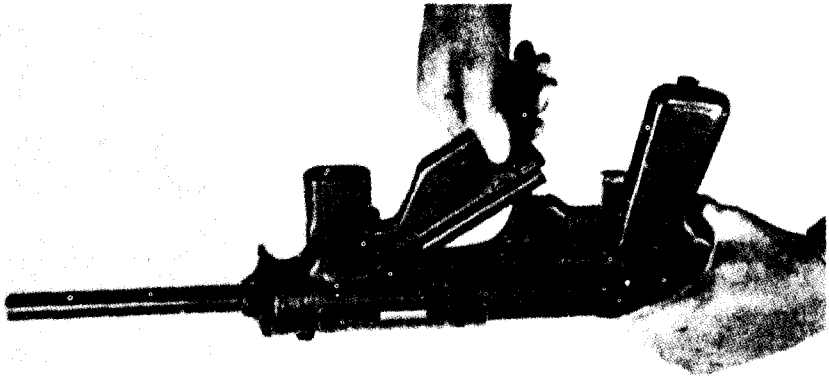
Remove the housing assembly by pulling up and to the rear on the rear end.
